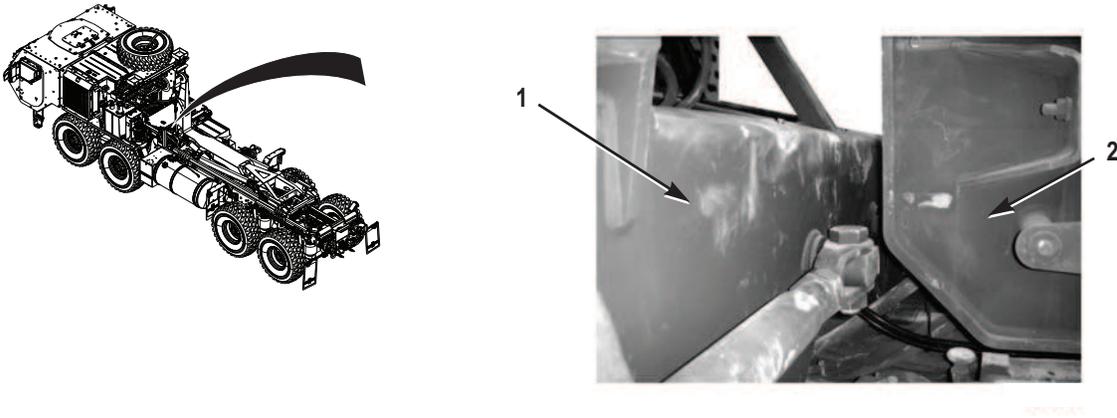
Distance Between Stowage Assembly and Hook Arm.
